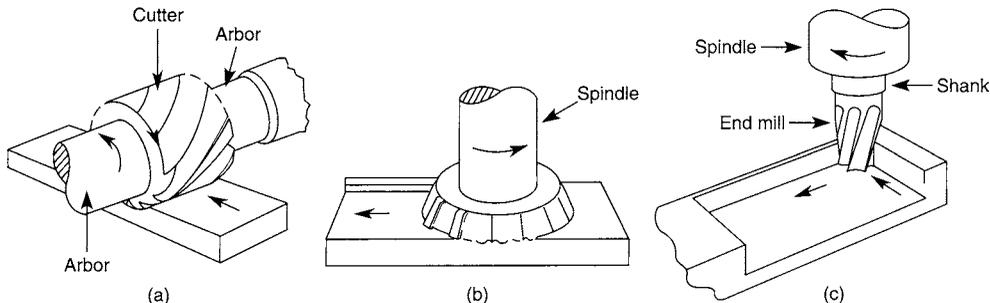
Basic types of milling cutters and operations. (a) Peripheral milling; (b) face milling; (c) end milling.
